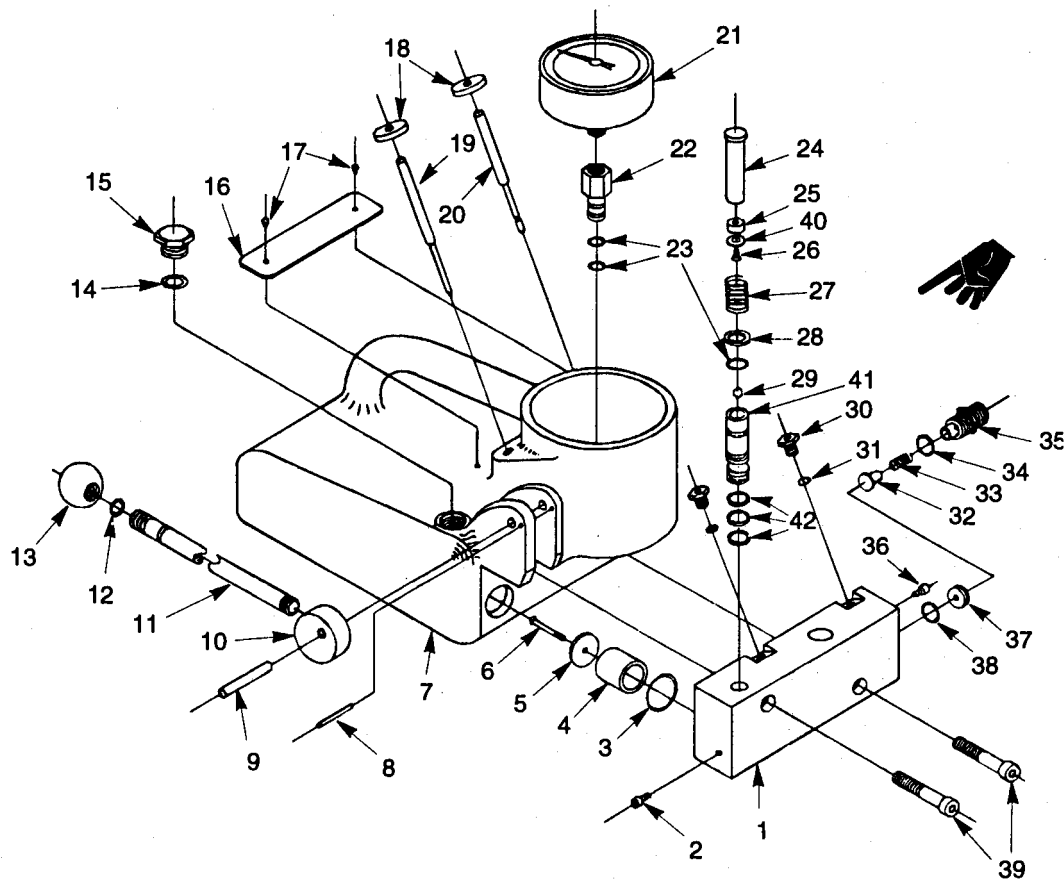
Diesel fuel injector nozzle tester - exploded view.
